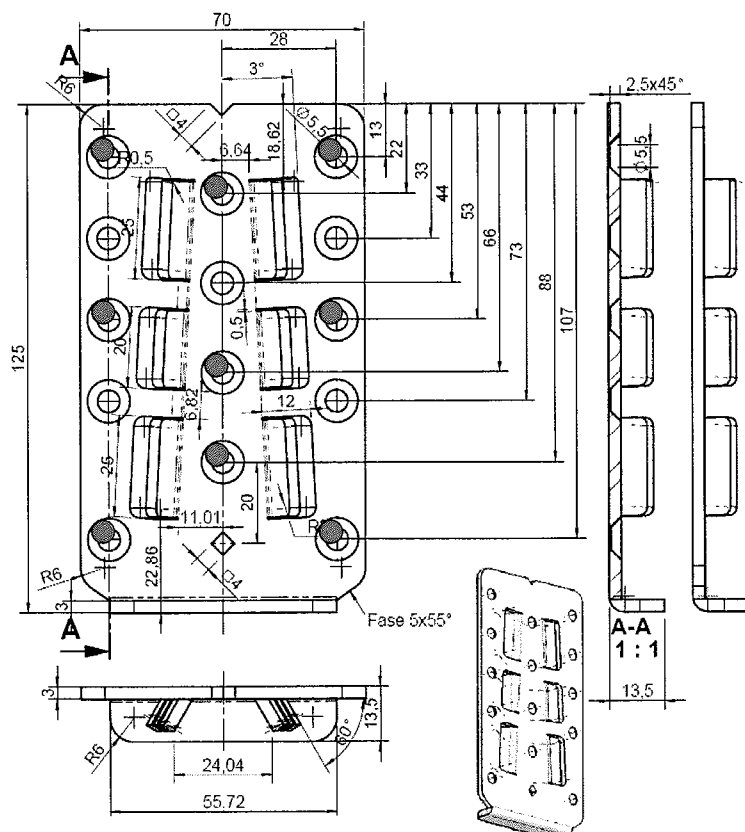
Header plate of the beam connector 125 x 70 (● screws for column connection)
